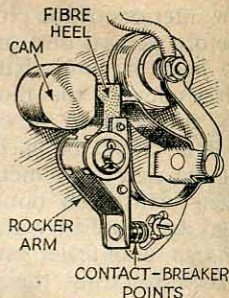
General layout of the type of contact-breaker fitted to the Miller flywheel magneto
